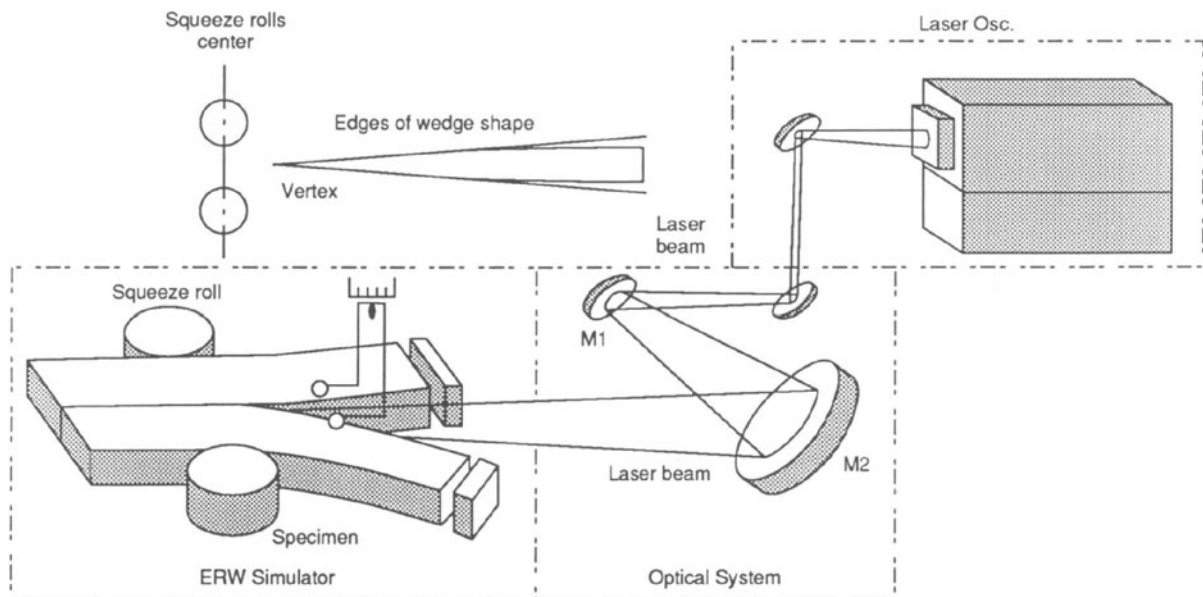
Schematic view of welding configuration used in laser-assisted electric resistance welding.
